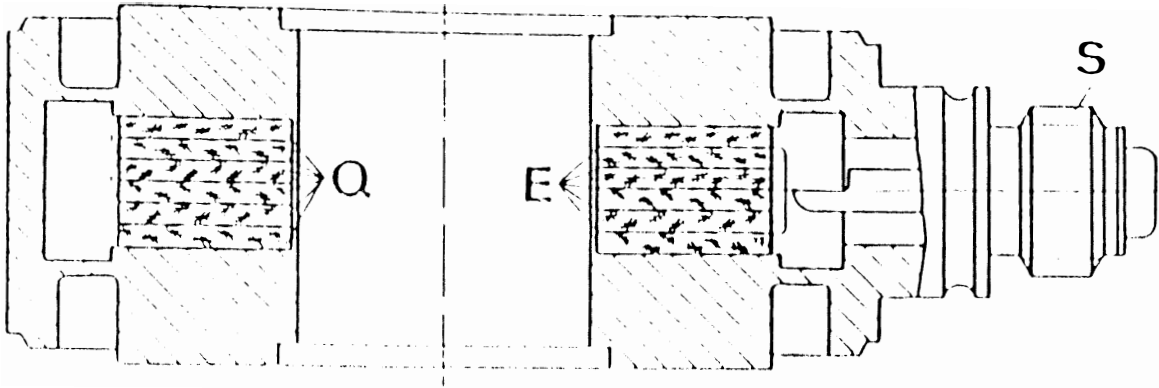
schematic cross section through a 3 - component force measuring element
